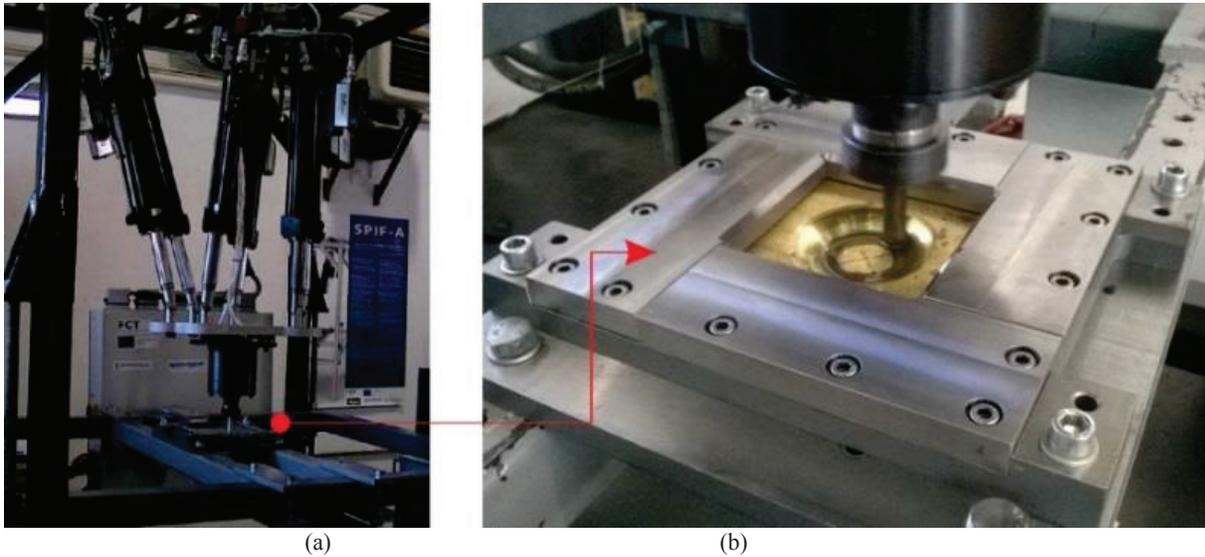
(a) SPIFA machine; (b) Forming conical frustum brass alloy Cu – 35Zn.
